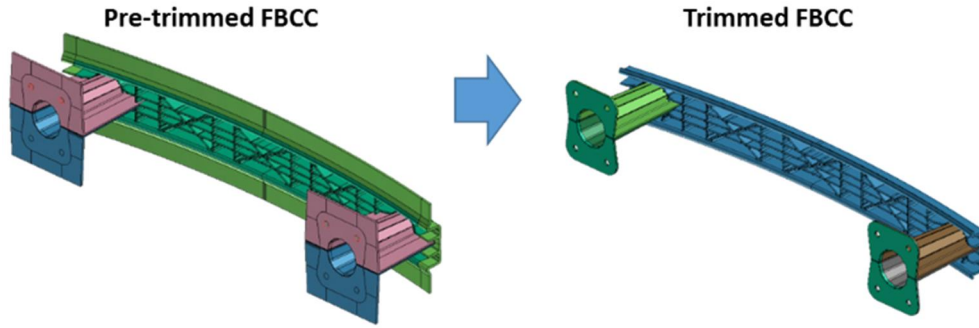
CAD image of the FBCC before and after trimming. Note that each component was trimmed separately prior to assembly.
